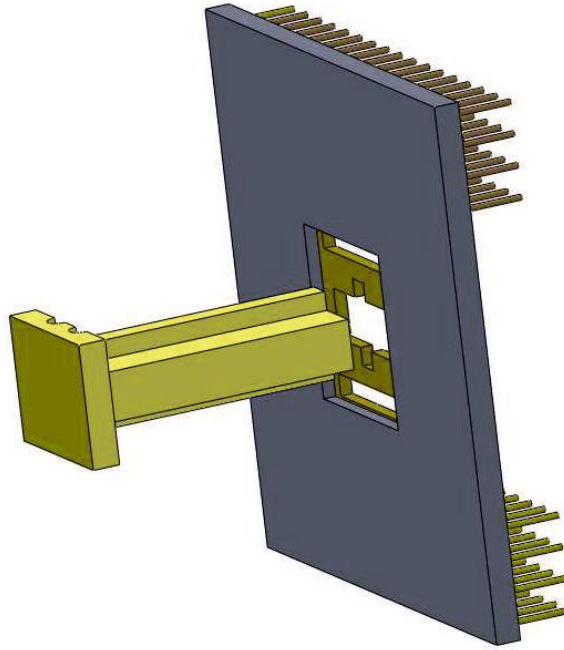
Gold plated copper chip holder and chip carrier with laser cut slots. The main part of chip holder is designed to fit through the slot. Ion traps are soldered onto the polished front plate, which is placed on top of the remaining chip carrier plate structure.
